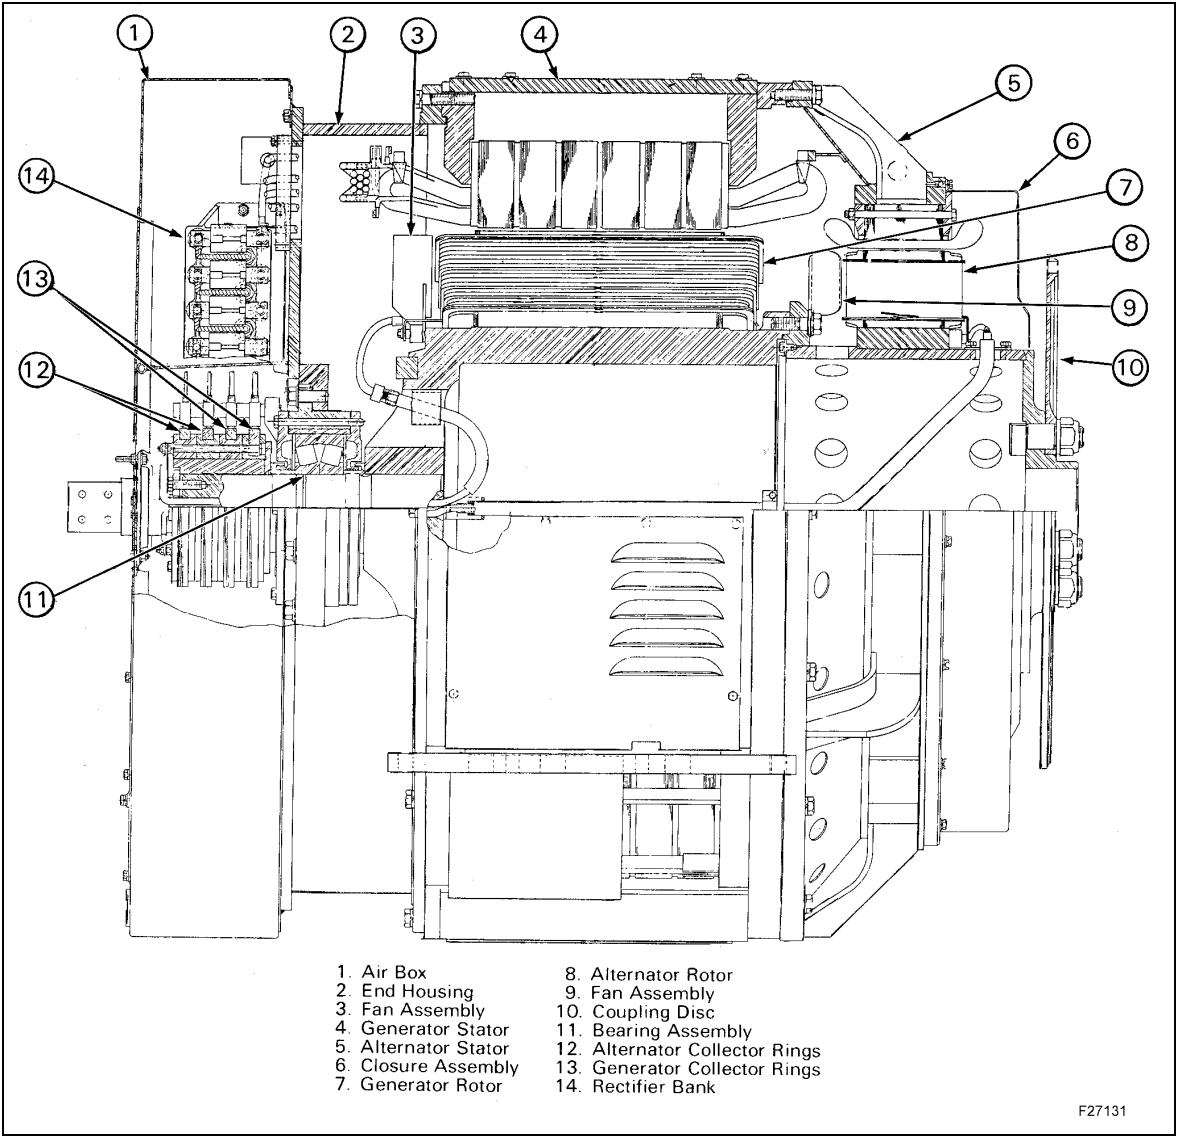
Typical AC Generator / Companion Alternator Assembly, Cross-Section
